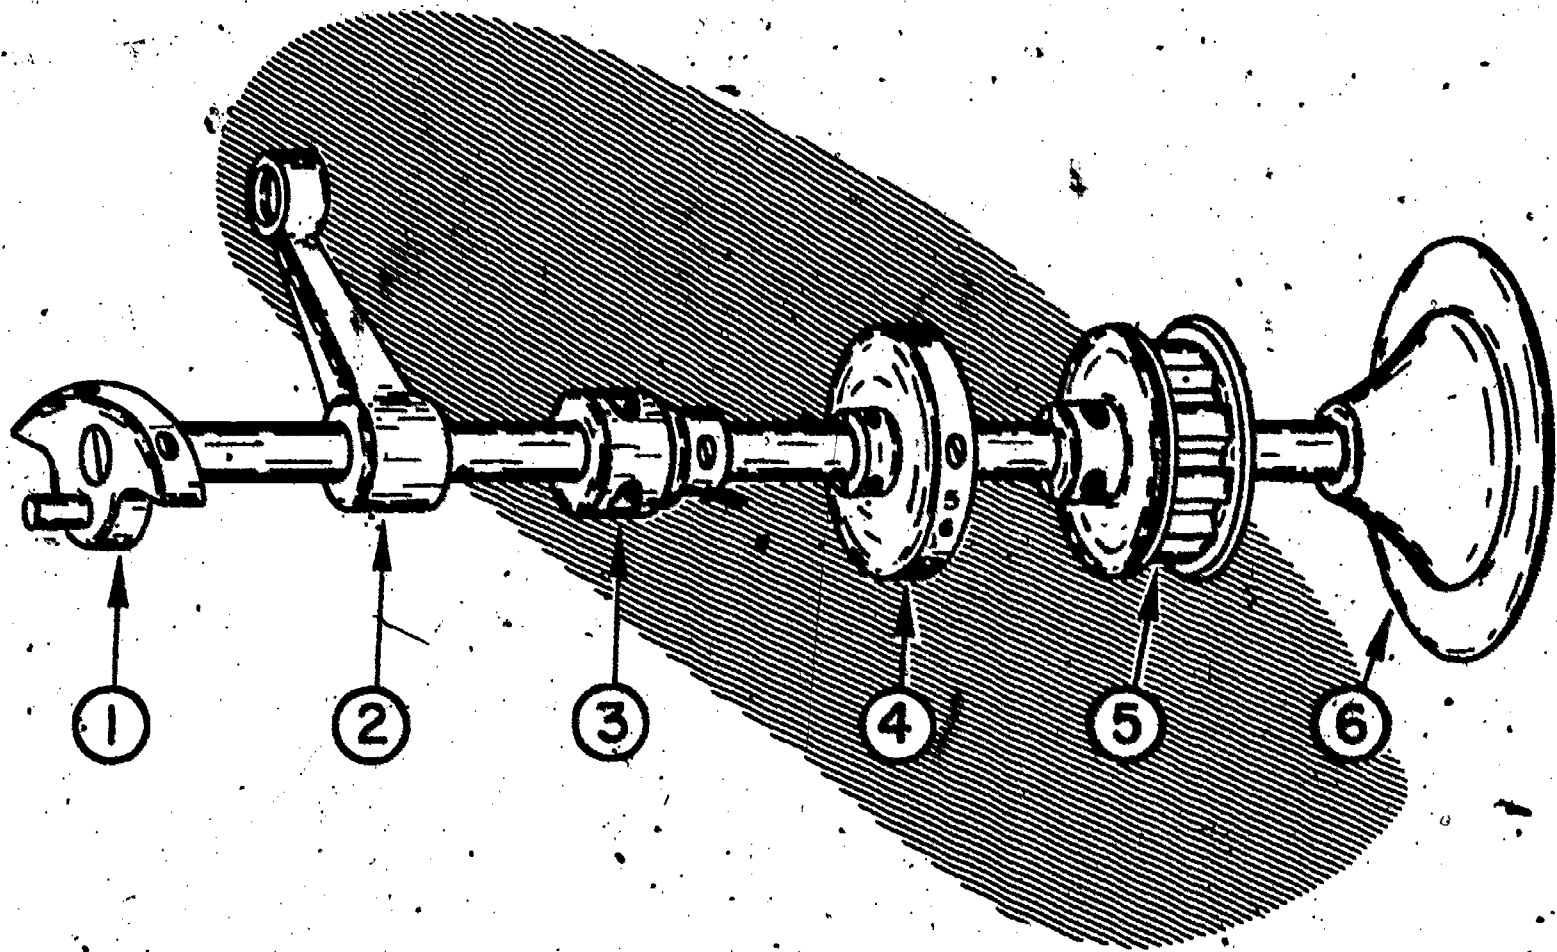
Arm Shaft Assembly, 111W Series Sewing Machine
